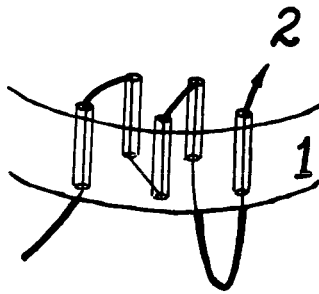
Isometric view of edge of thermopile jig - 1, showing wire - 2 being sewn through holes in jig.
